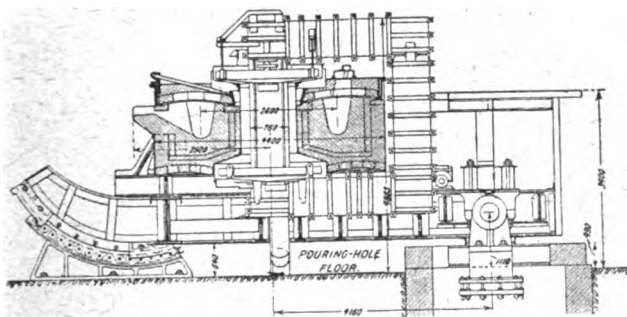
10-TON 1,000 H.P. FRICK FURNACE.
